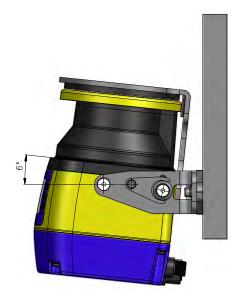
Scanner Mounting and Pitch Angle Adjustment
